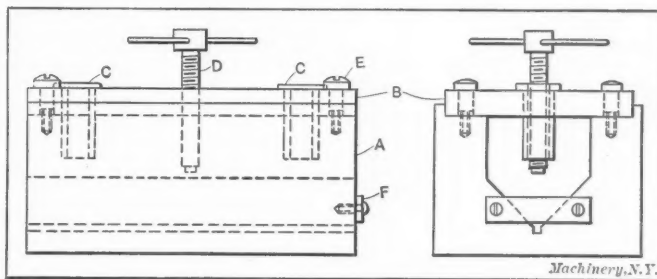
Jig with Removable Top and V-shaped Locating Surfaces for Drilling Shaft Ends
